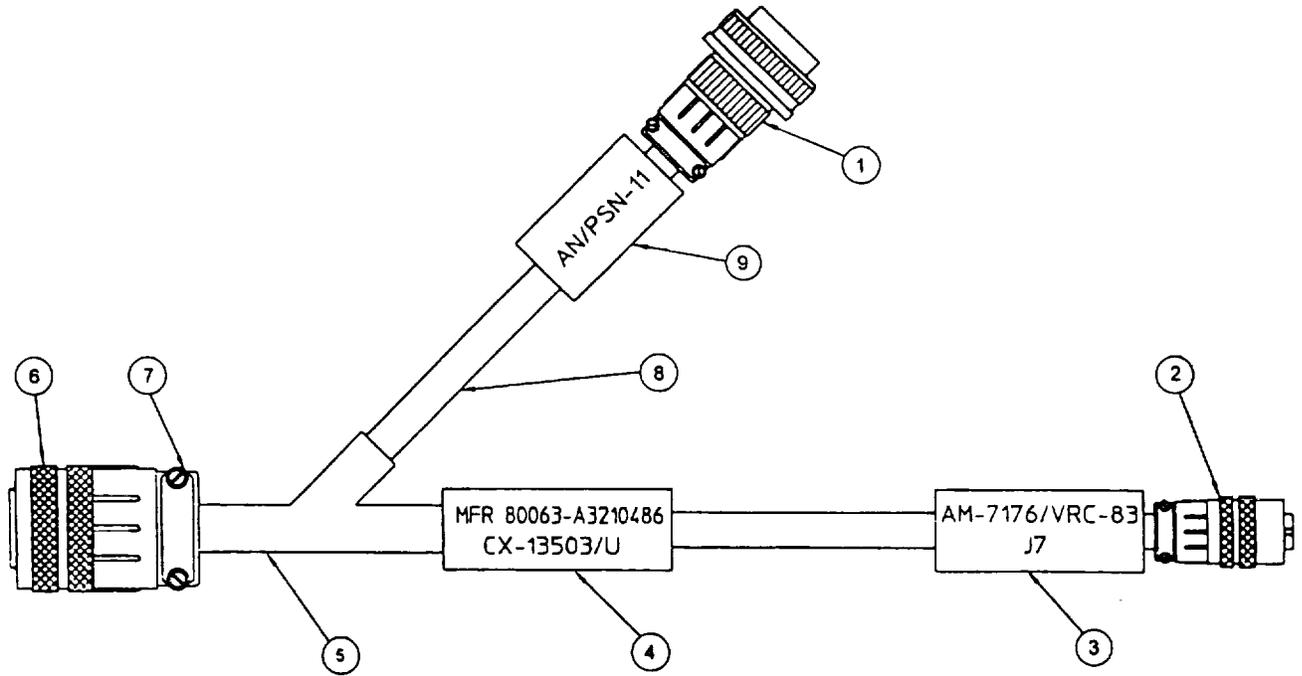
Cable Assembly, Special Purpose, CX-13503/U
